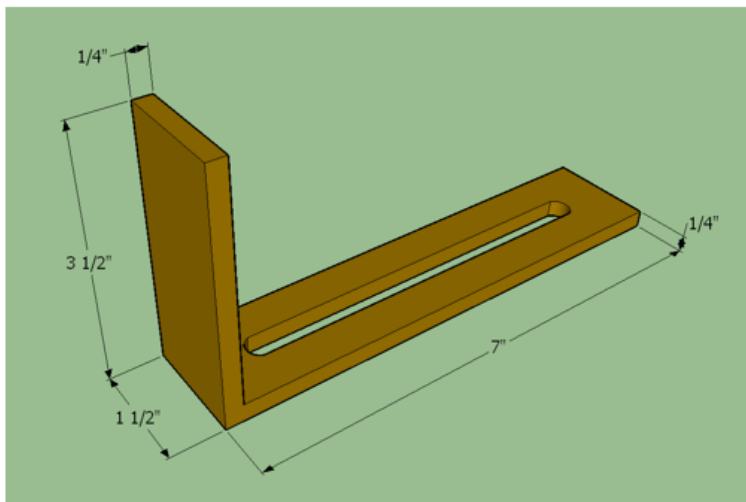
Gripper (L2)- Sample Holder of Rectangular Specimens.
